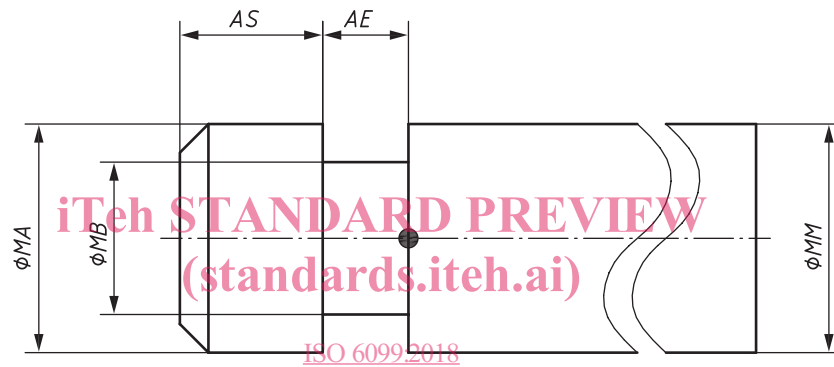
RFS_x — Grooved piston rod end with TRP at the shoulder level
